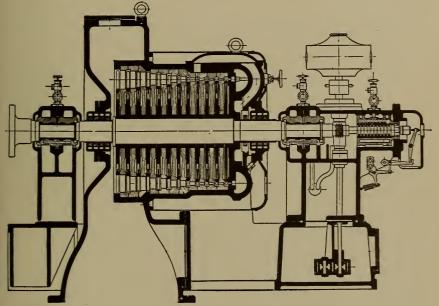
Axial Section Showing General Arrangement of De Laval Multi-Stage Steam Turbine
